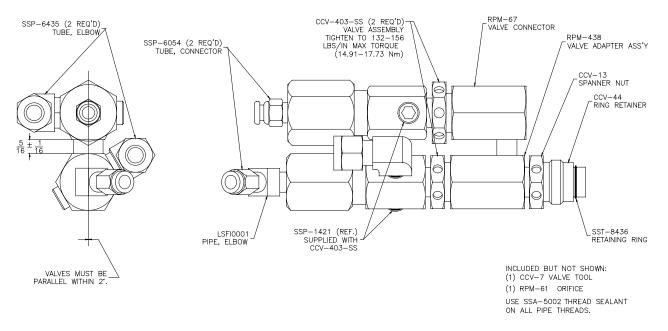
RPM-408 2-Valve Assembly - Trigger and Solvent
